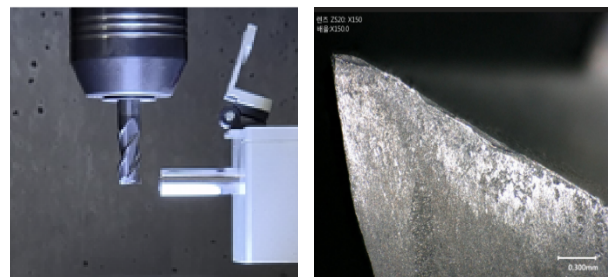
(Left) Vision system installed inside the machining equipment for end mill imaging after machining. (Right) Flank wear of the end mill captured at 150x magnification.
